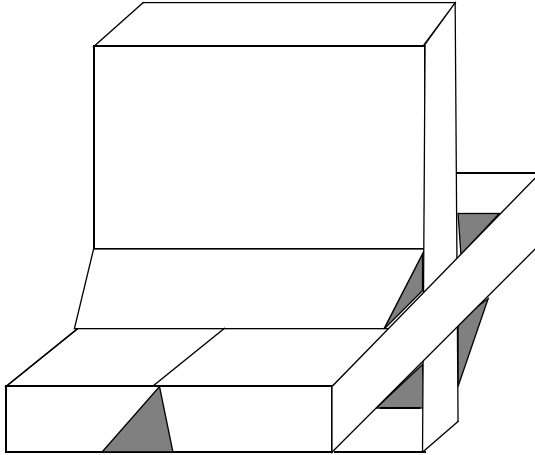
A Combined Weld is a Mixture of Fillet and Butt Welds.
